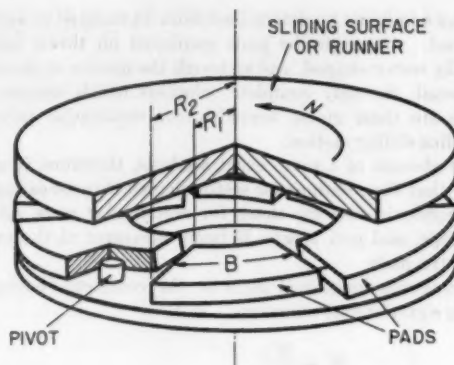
DIAGRAMMATIC SKETCH OF PIVOTED-PAD THRUST BEARING
